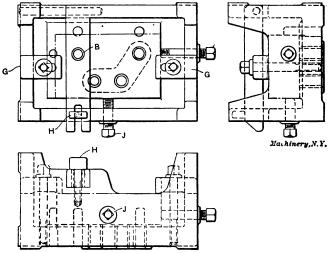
Jig where Thrust of Drilling Operation is taken by Clamps
